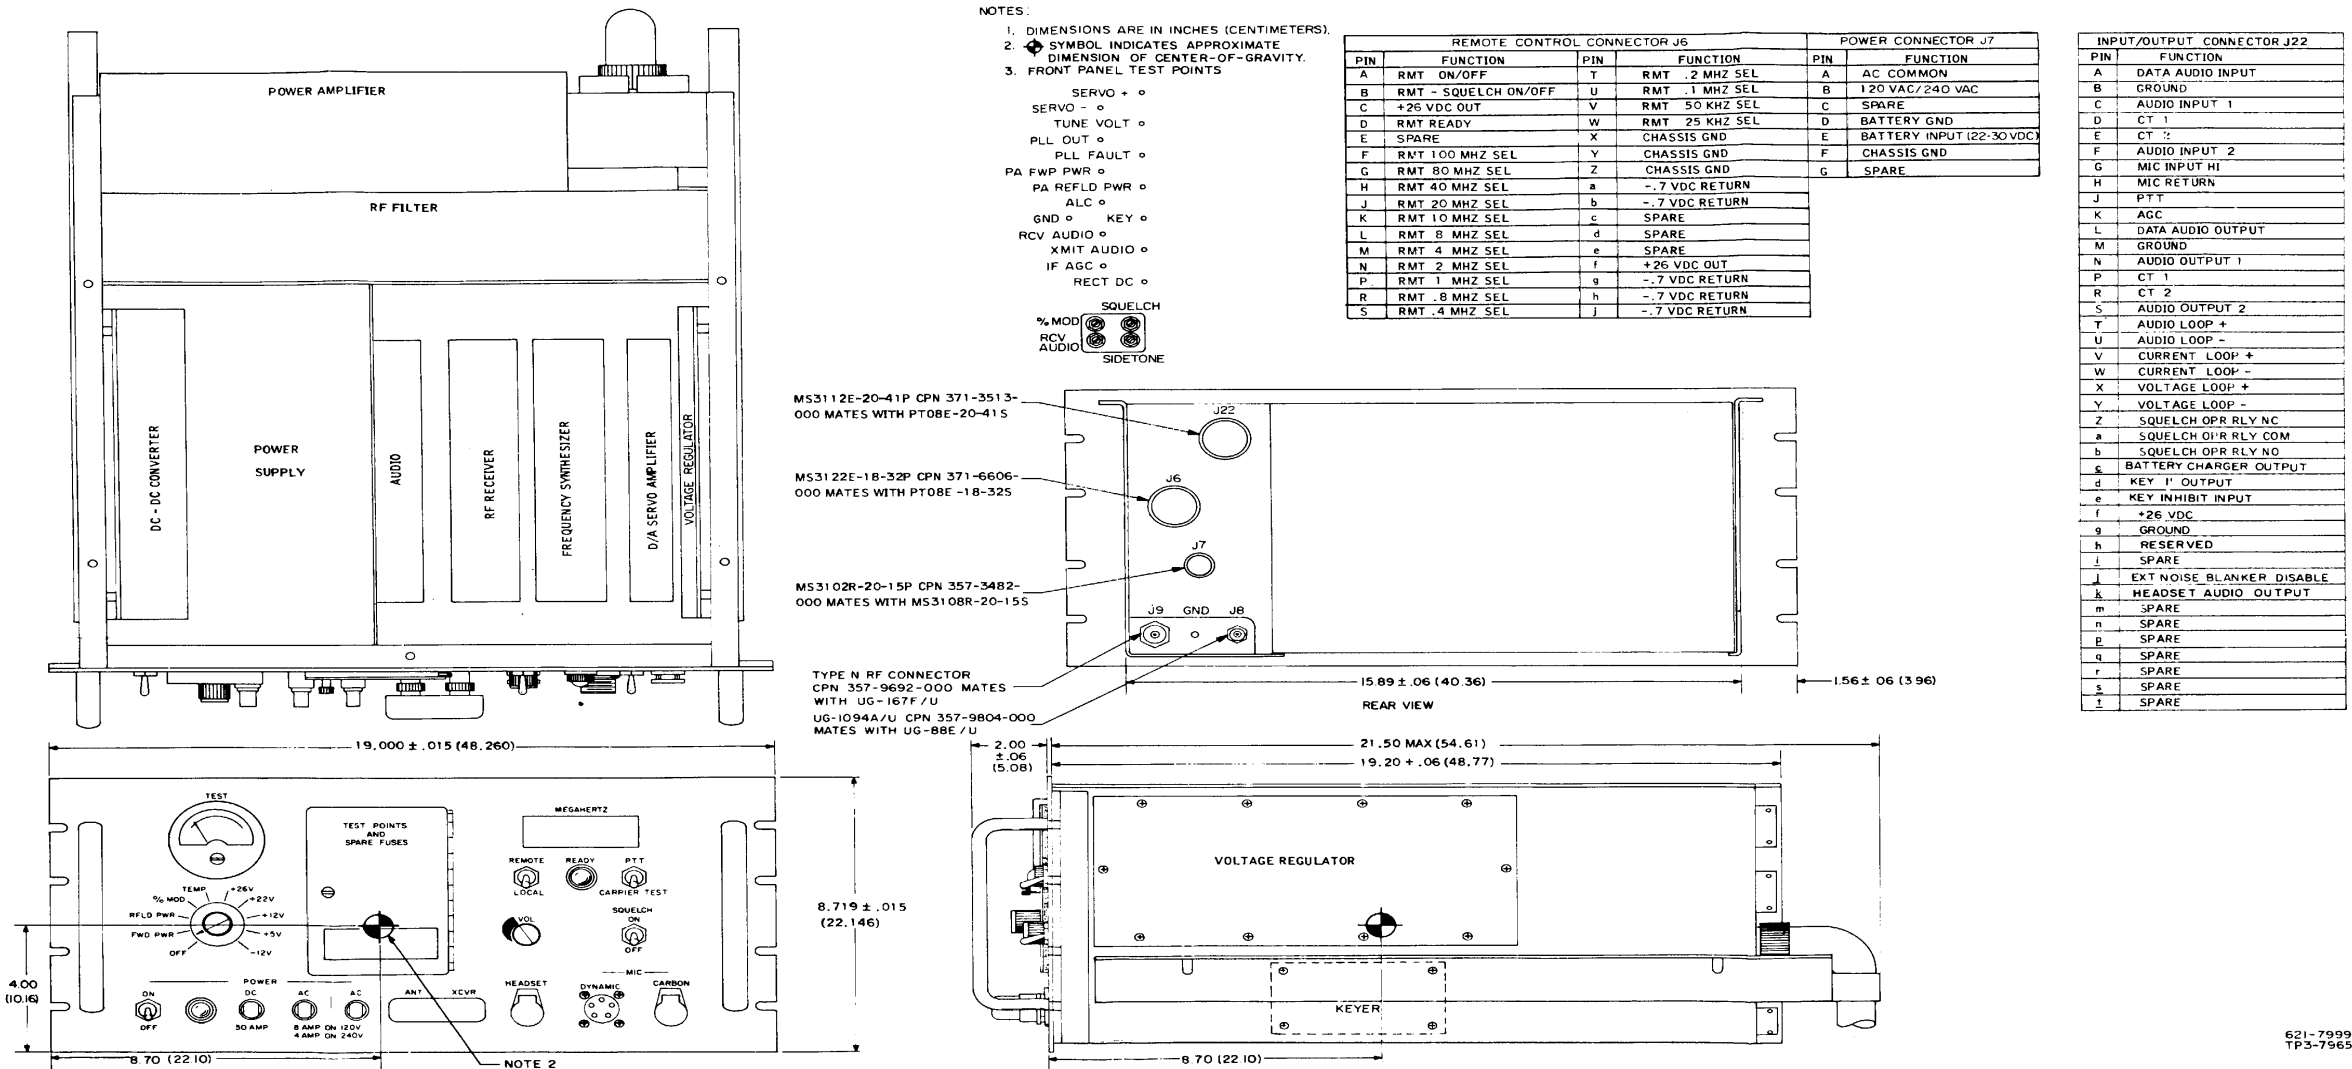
Radio Receiver Transmitter RT-980/grc-171, Outline and Mounting Dimensions Diagram (Sheet 1 of 2)
